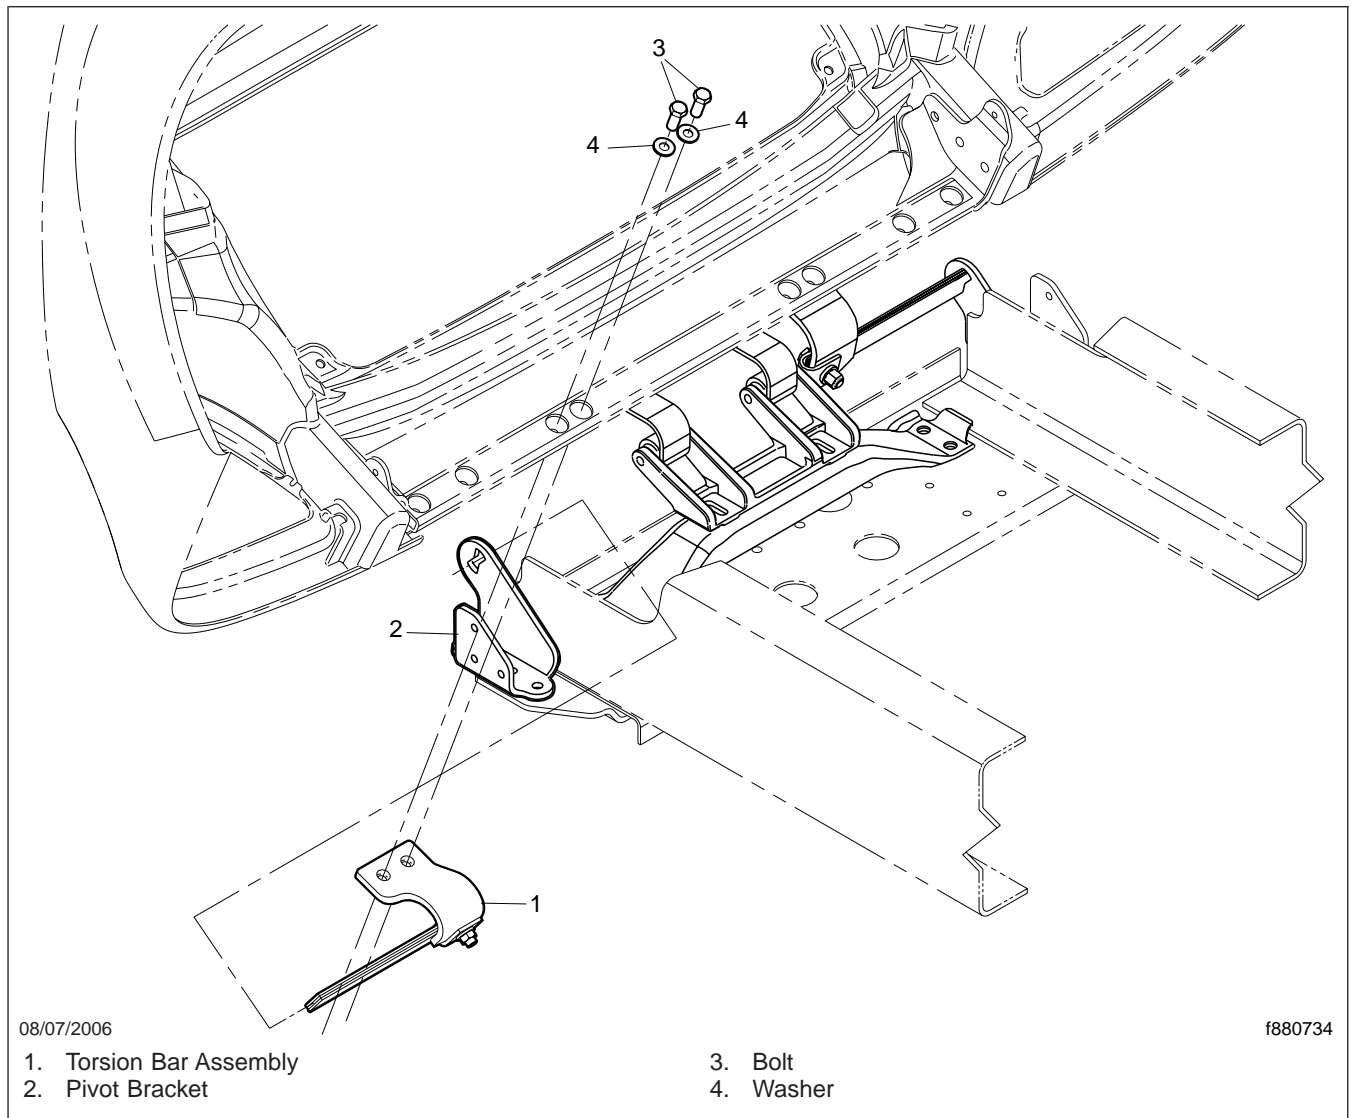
, Hood Tilt-Assist Assembly (vehicles with engines manufactured through December 31, 2006)
